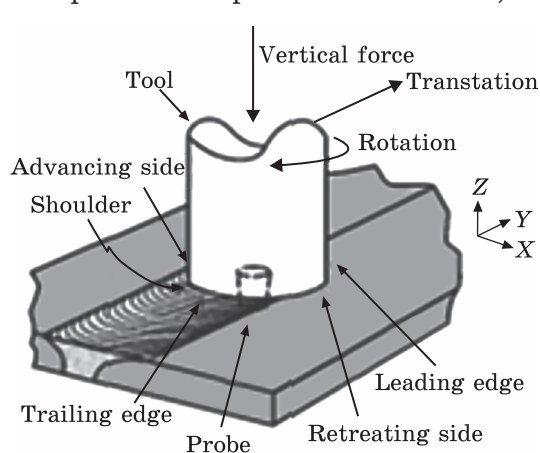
Schematic illustration of the friction stir welding process [44]
